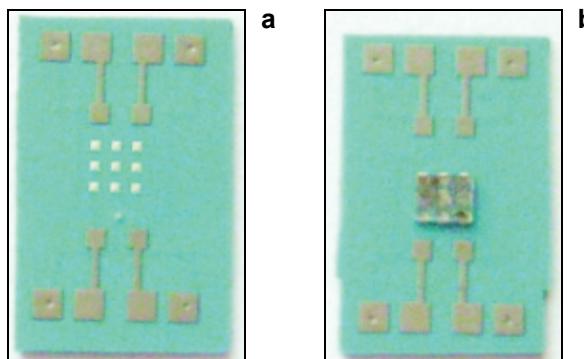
Top view of the LTCC package (a) and with sensor chip (b).
